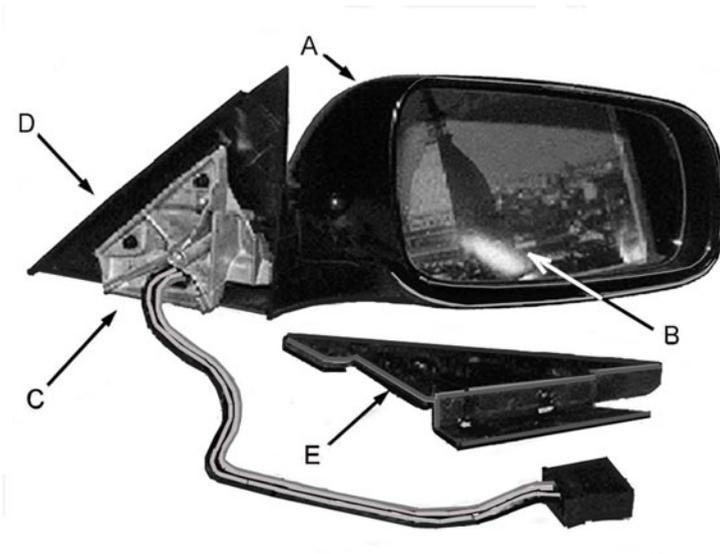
Basic components of an external mirror: A) casing; B) reflecting device; C) bracket; D) molding; E) seal.
